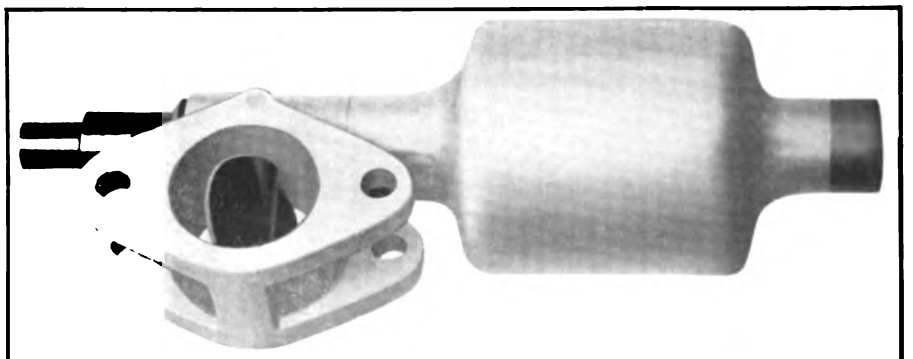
Pierce Model G Controller, Showing the Valve Box and the Butterfly That Regulates the Fuel Supply.
